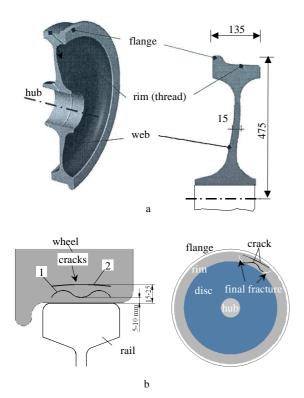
Main geometry characteristics of the wheel (a) and place and depth of possible fatigue cracks initiation (b) [1]
